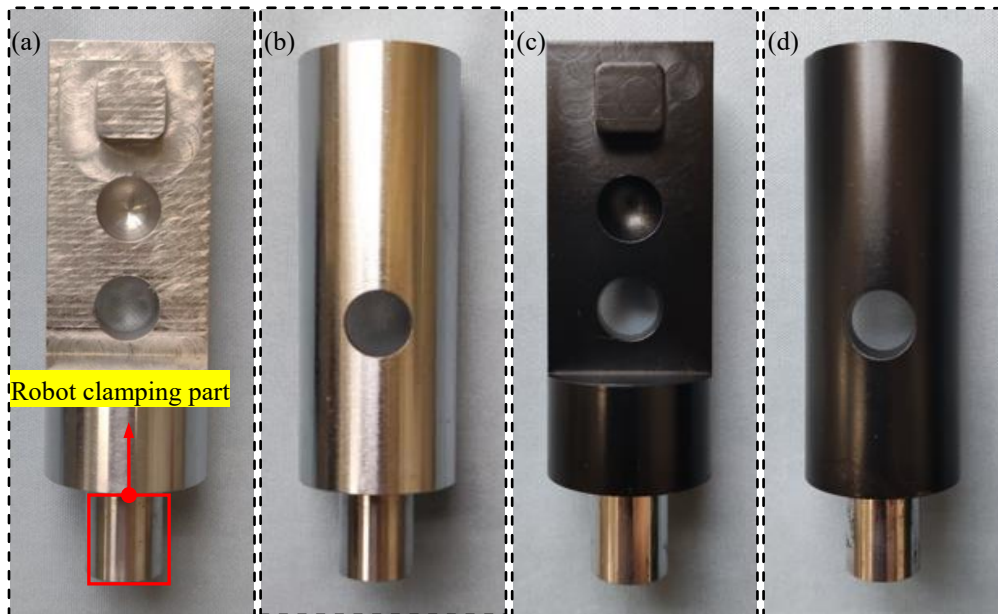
Before applying paint to the test workpiece: (a) front view; (b) rear view; (c) painted test workpiece (front view); (d) painted test workpiece (back view).
